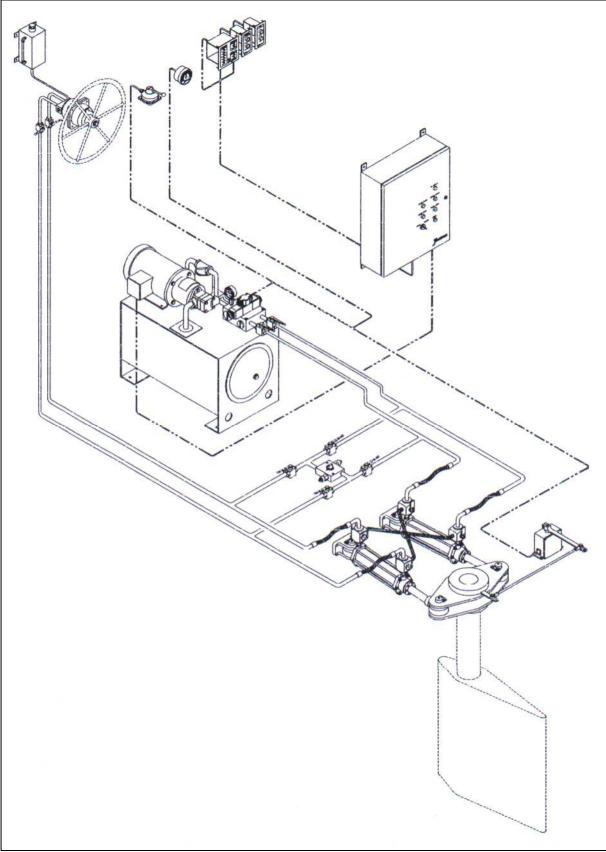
Typical steering gear arrangement of a large vessel.
